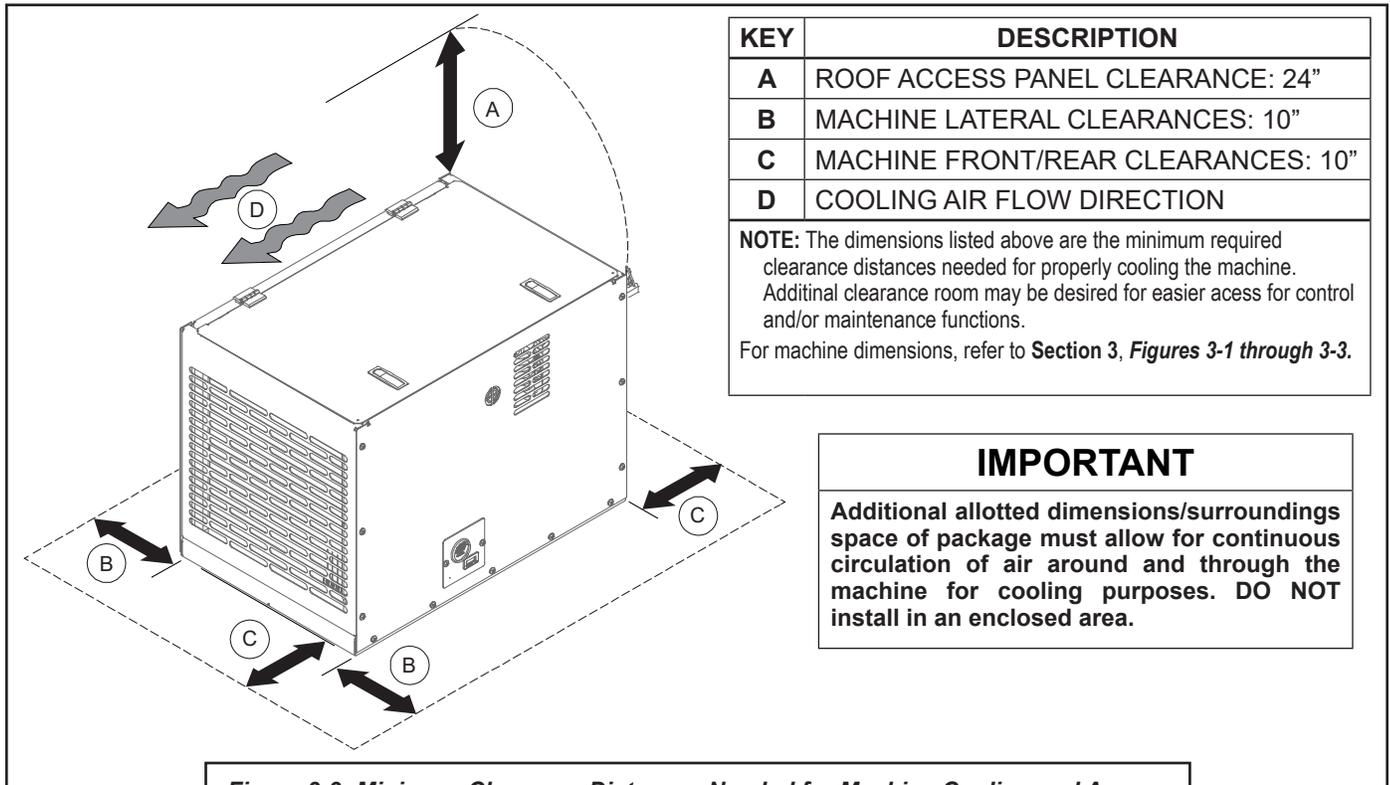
Minimum Clearance Distances Needed for Machine Cooling and Access
